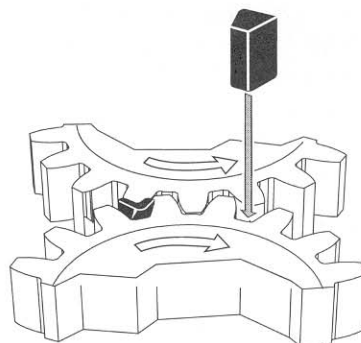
Rotating the gears onto the first chock, and inserting a second chock on the opposite side of the engaged teeth.
